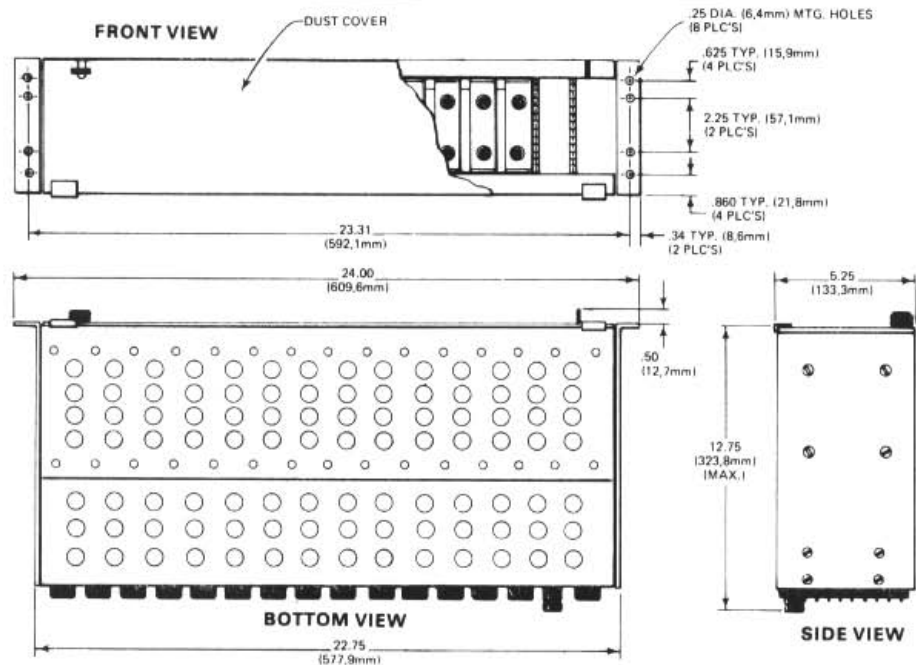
SURFACE MOUNTED CARD RACKS (SMR), OUTLINE AND DIMENSIONS
